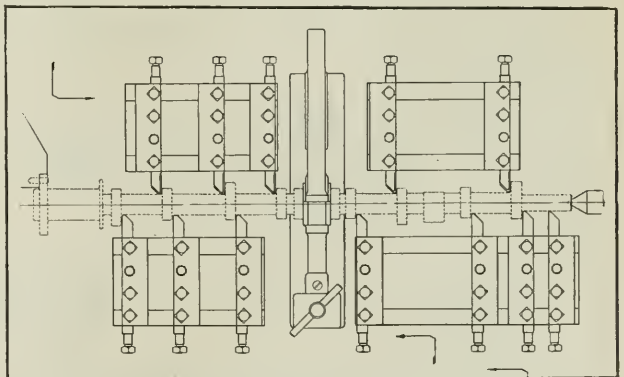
Turning the Camshaft, the Cuts being divided between Tools in the Front and Rear Holders
